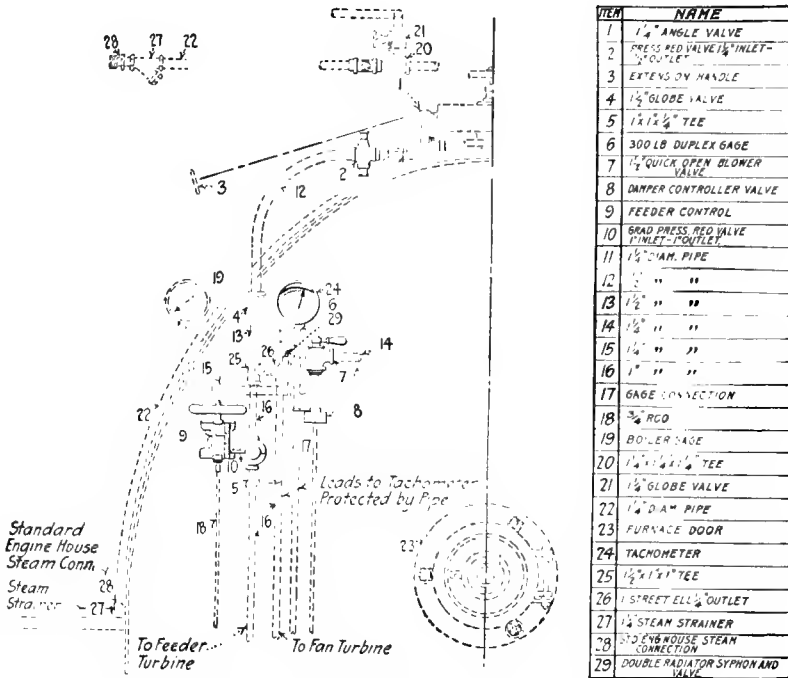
Locomotive Cab Equipment for Powdered Coal.
